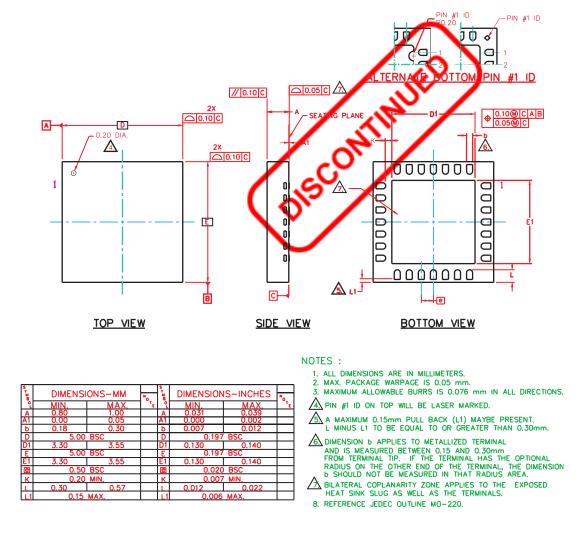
S29 Package Outline - 28 Pin 5 mm x 5 mm x 1 mm QFN
